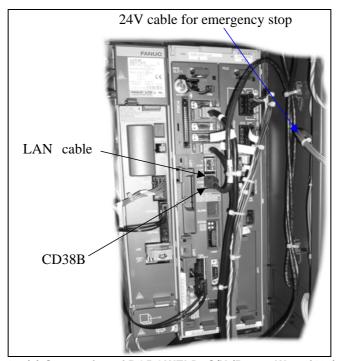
(a) Connection of ROBOWELD iC/H (Power Wave i400) (1/7)
